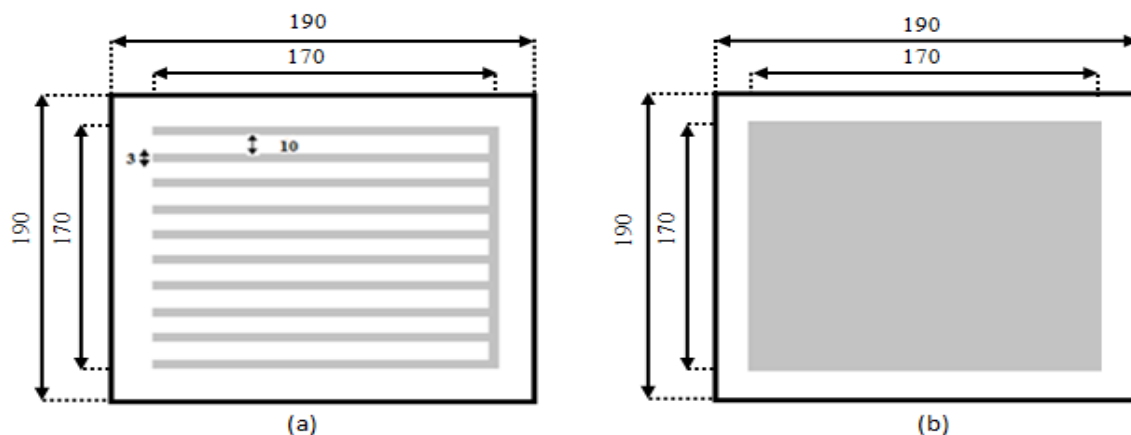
Bottom (a) and top (b) view of the flat ozone generator (all dimensions in mm)
